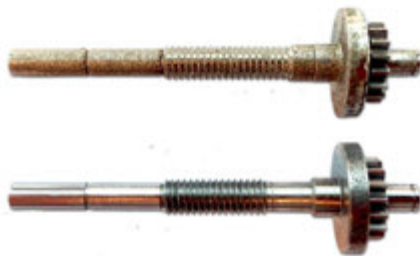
Two drive shafts, one printed, one produced on (CNC) lathe
